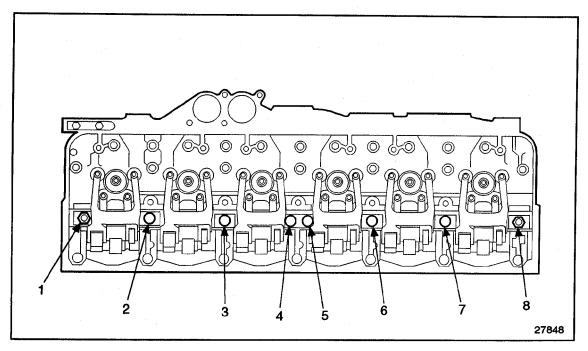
Rocker Arm Shaft Bolts and Nut Identification Numbers (Series 60G Engine)
